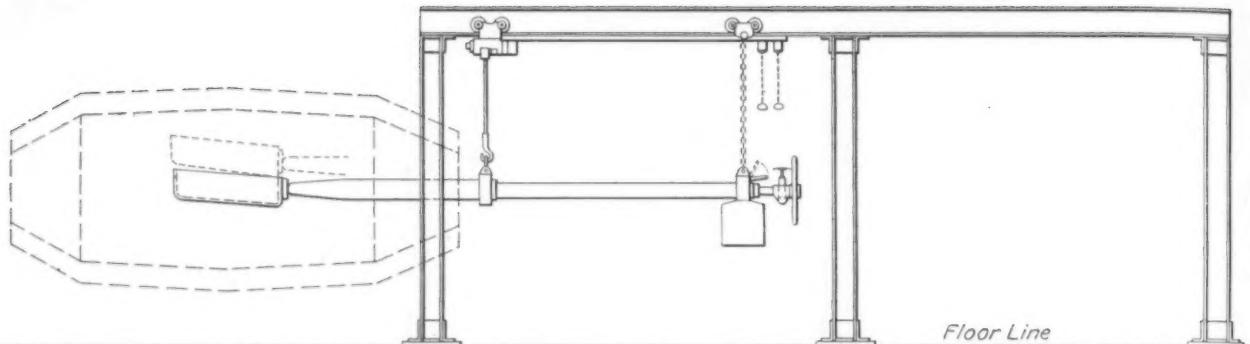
The Deblanchal furnace may be charged either by hand or by means of a mechanical charging device similar to the one sketched here.
